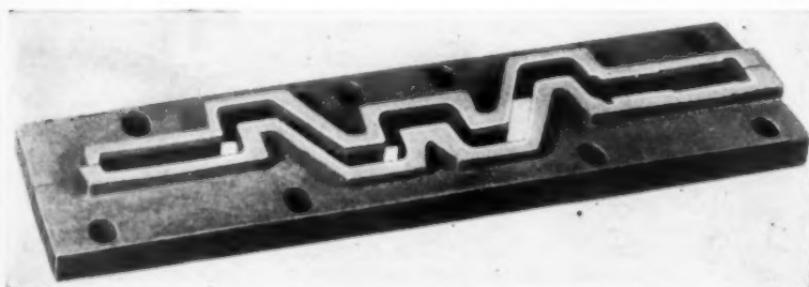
This die for hot-trimming crankshaft forgings has hard-facing alloy deposited in a groove similar to that sectioned in Fig. 6.
